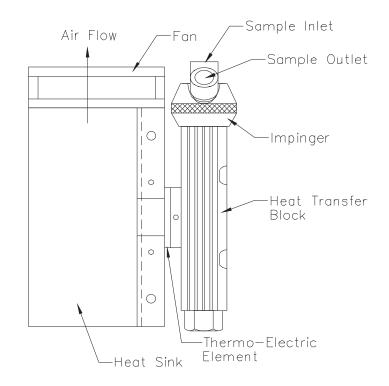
Heat Exchanger, Impinger and Heat Sink Assembly
